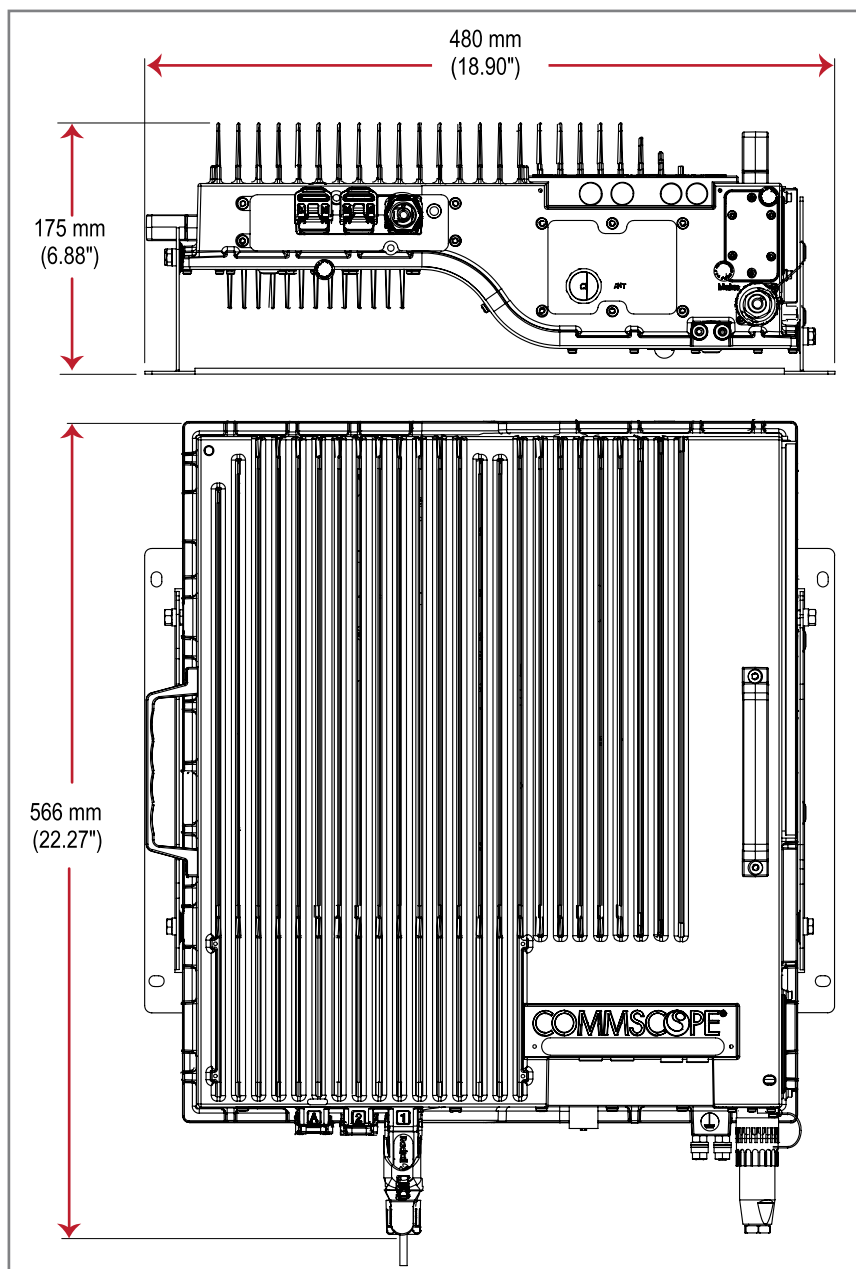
Mounting Dimensions for Single Mounting Bracket without Splice Box
